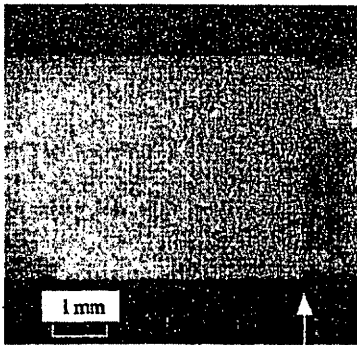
Observation of fracture surface in the vicinity of the notch bottom
